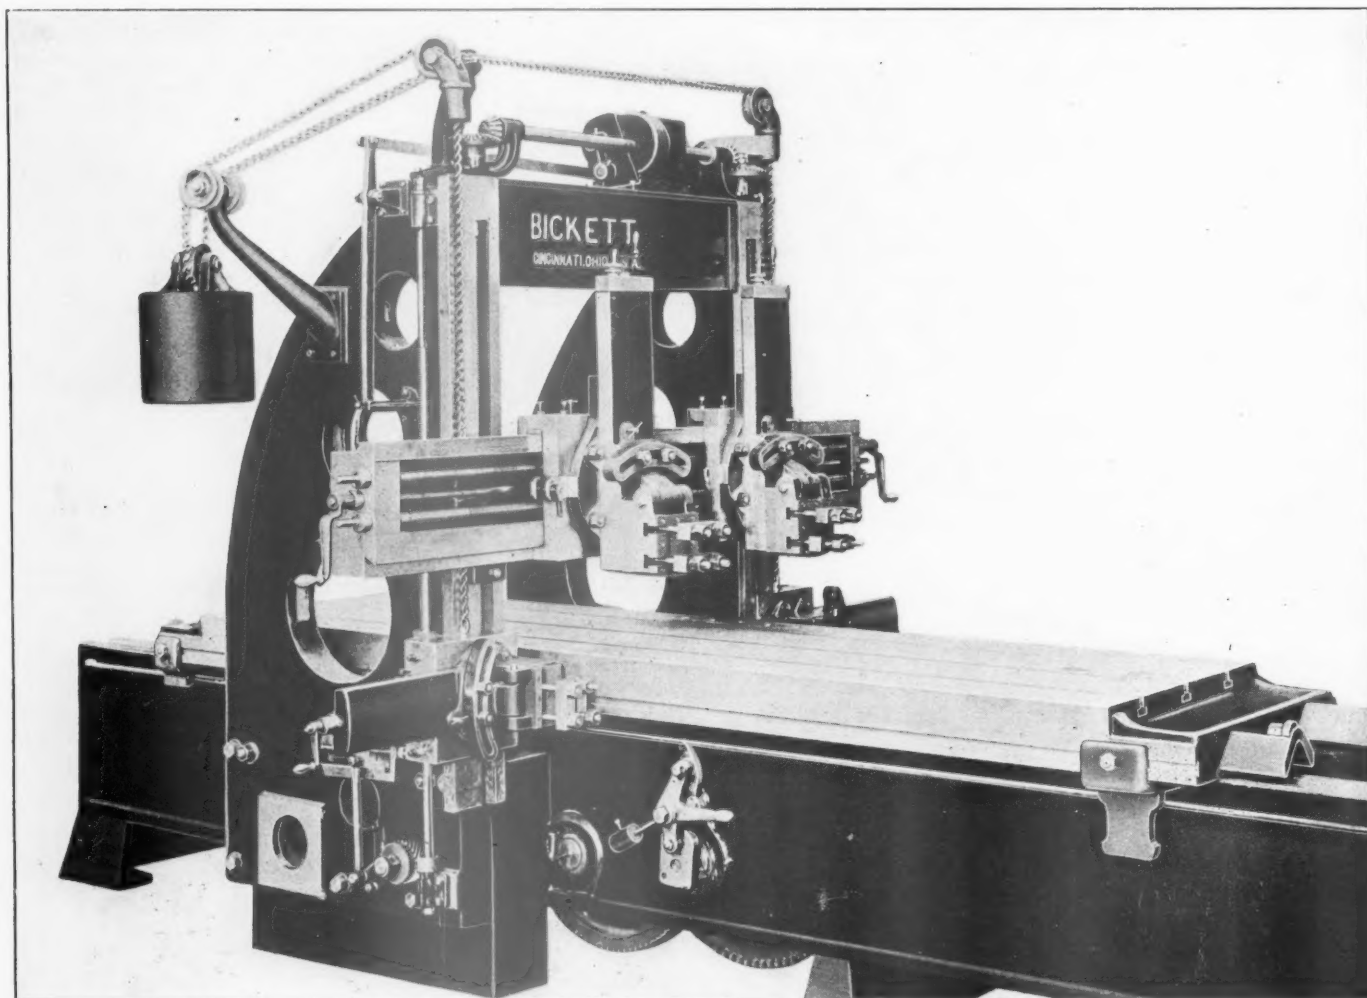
A 42-In. Bickett Planer Designed for Heavy Work
